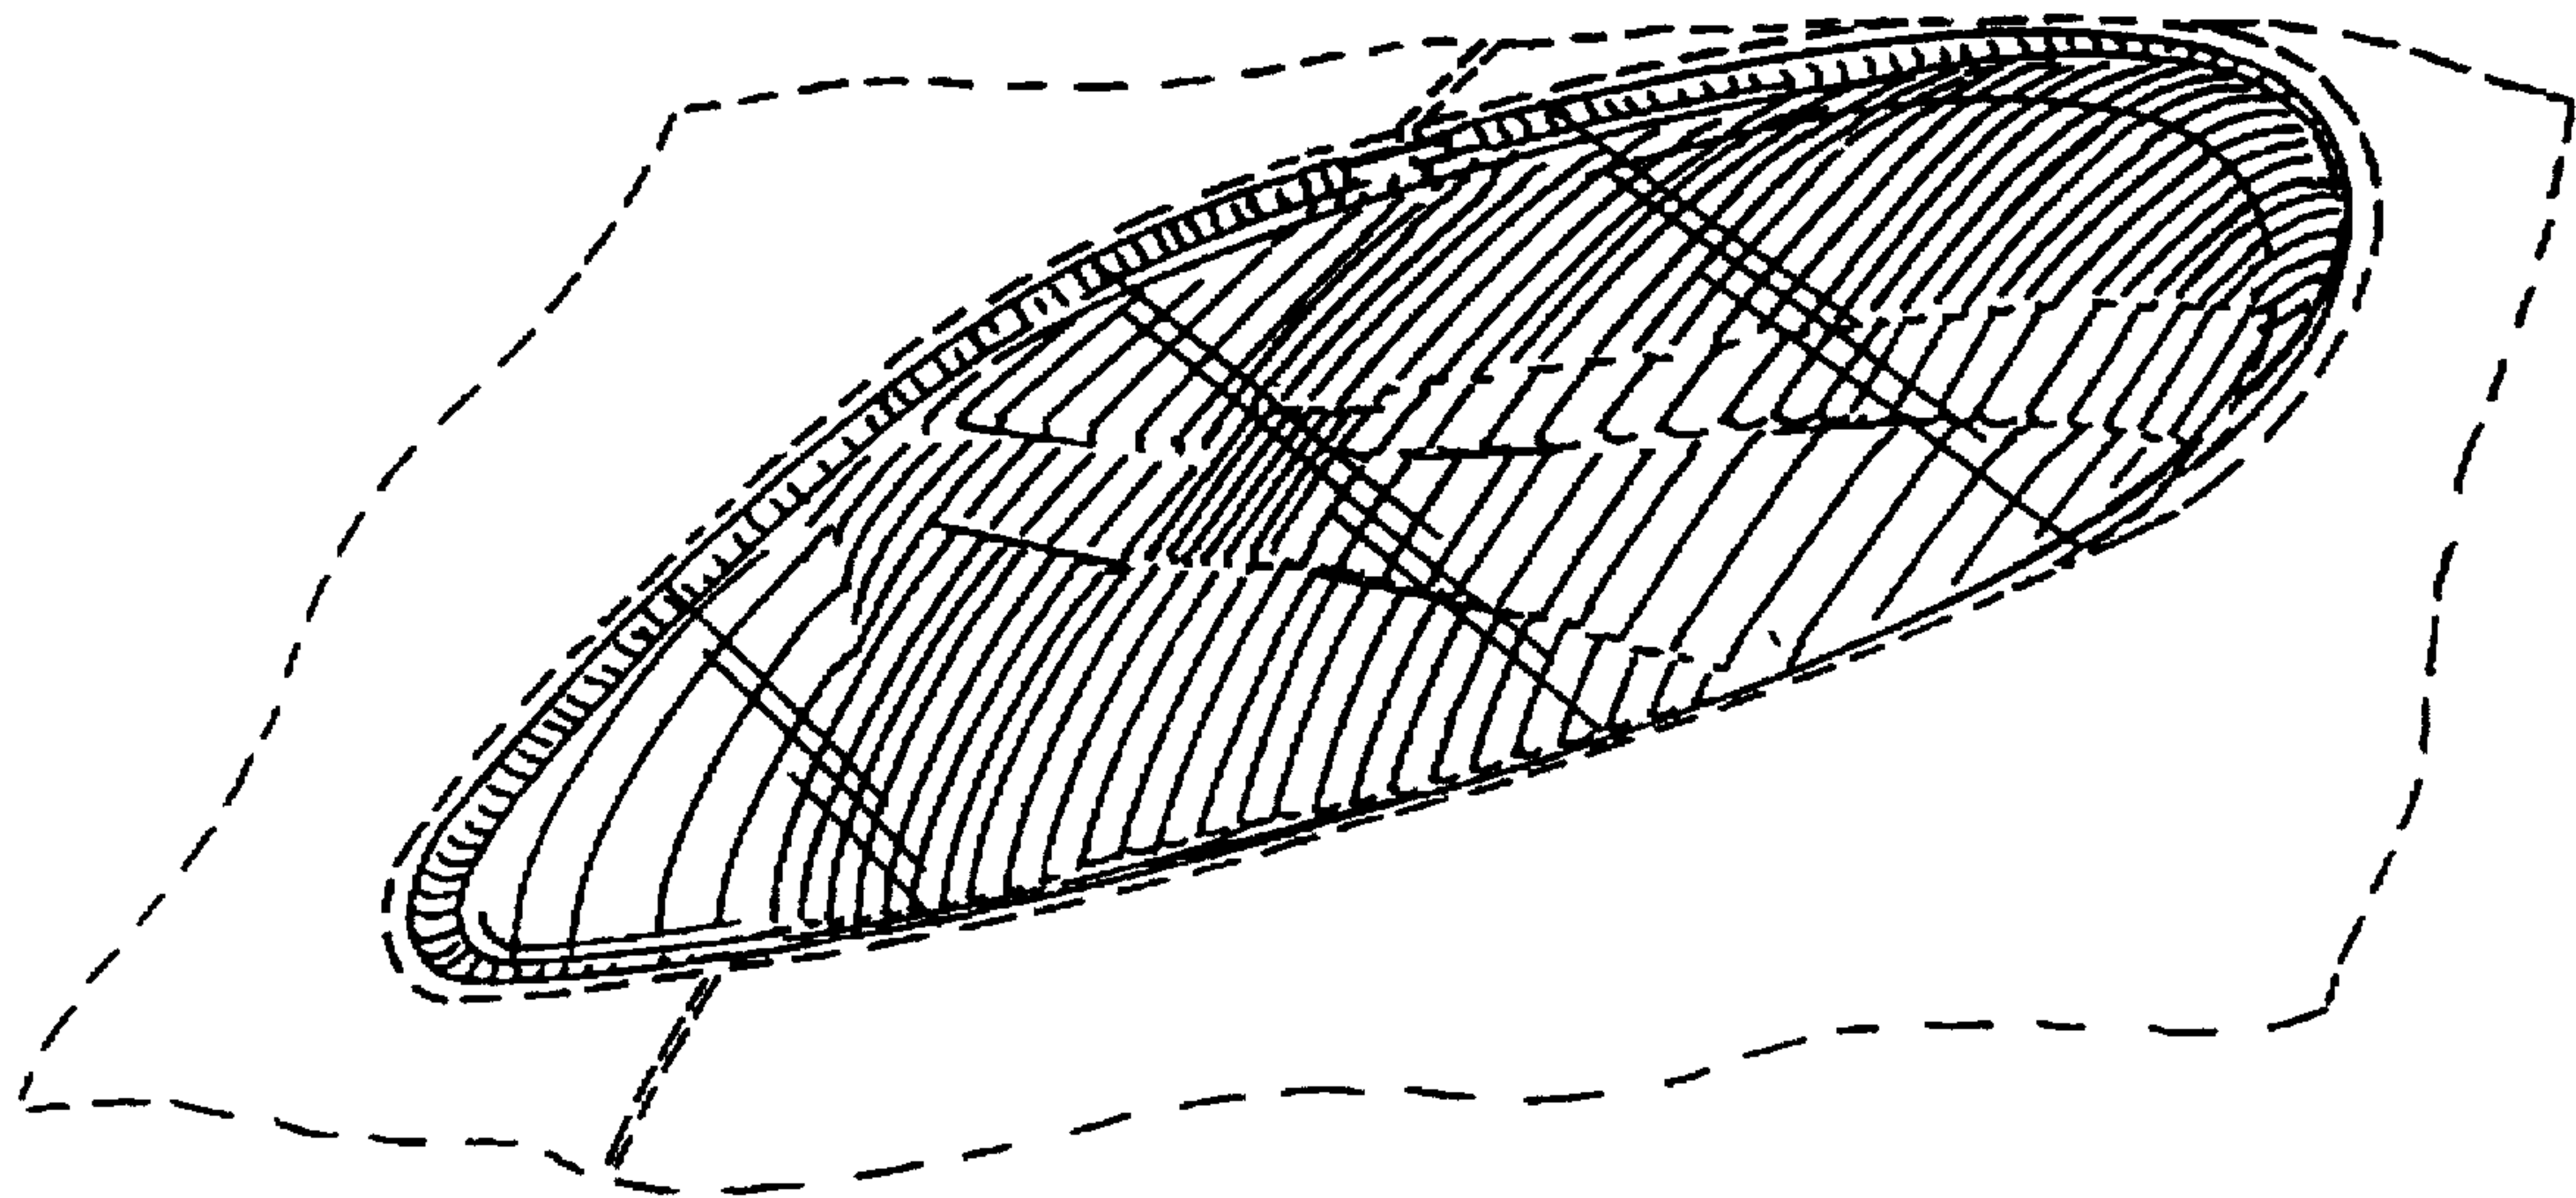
is a side perspective view from the front of a left side light assembly of an exterior surface configuration of an automobile front light assembly according to our novel design;
